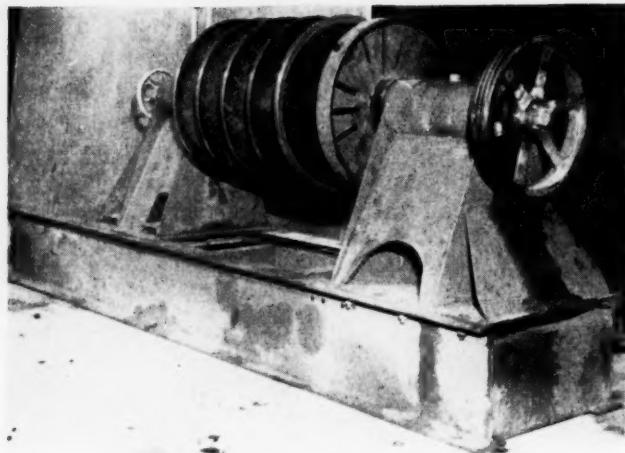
A shop-made lathe which was specially devised for "guide-sleeve" work.
